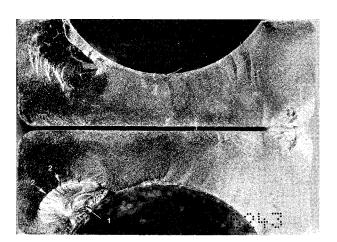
Matching fracture surfaces of the outer race of the No. 2 bearing showing initiation from the bottom of a spall (arrow 1) and propagation by fatigue (arrow 2).
